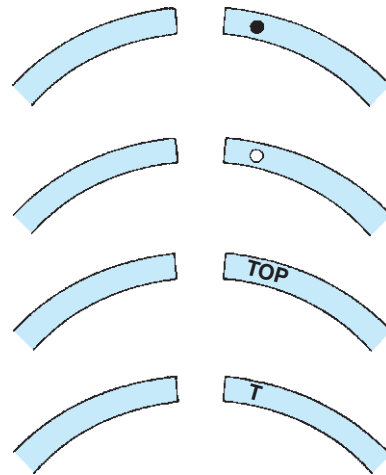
Identification marks used to indicate the side of the piston ring to be placed toward the head.
